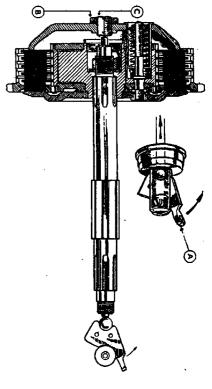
Clutch, Gearbox Mainshaft and Clutch-OPERATING MECHANISM.
